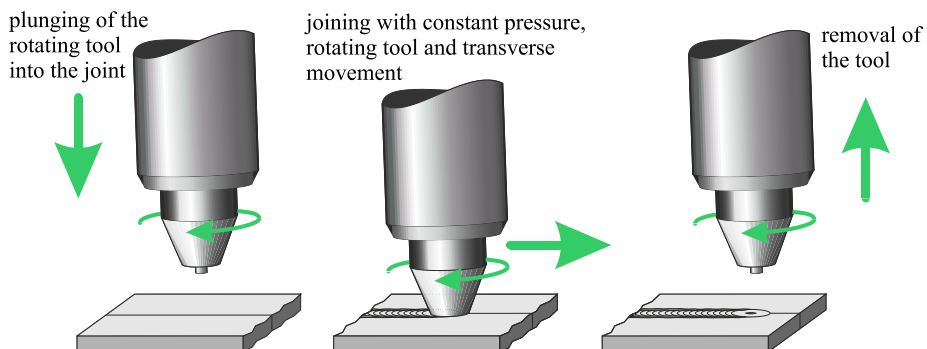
The friction stir welding process. Illustrated without clamping.
